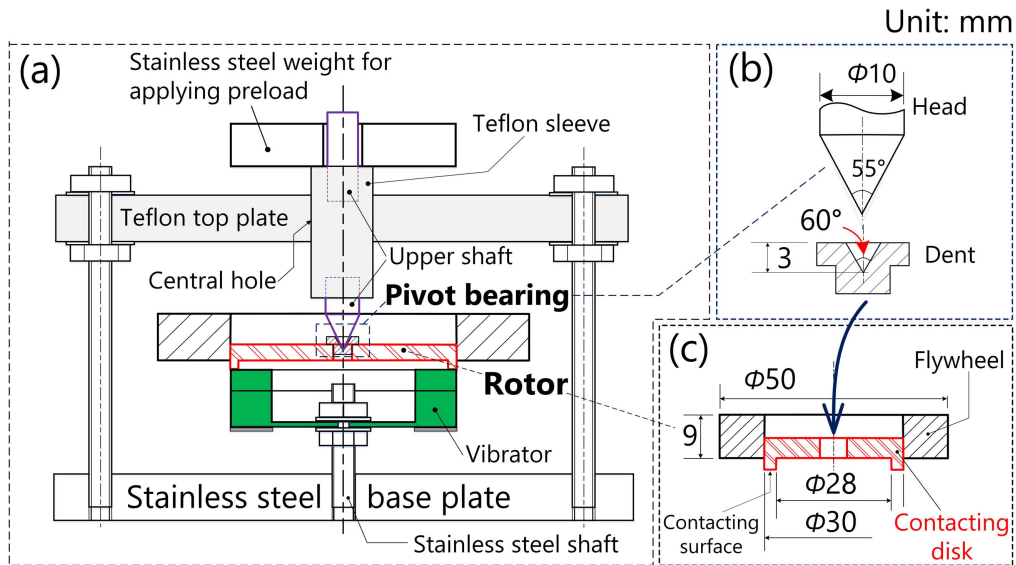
Testbed for evaluating motor performance. (a) Front view, (b) pivot bearing, and (c) rotor and additional flywheel.
